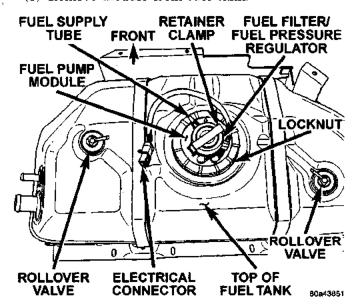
Top View of Fuel Tank and Fuel Pump Module
